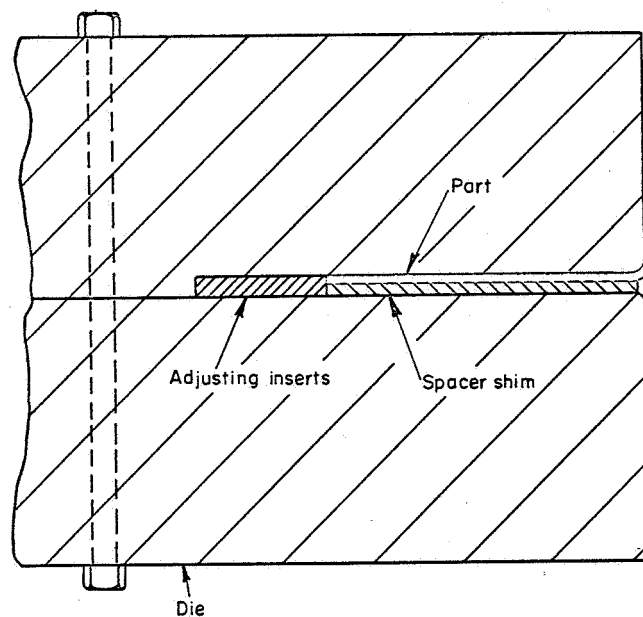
SECTIONAL VIEW OF LINEAR STRETCH TOOLING
